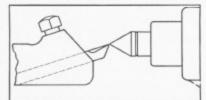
Set Cutting Edge of Lathe Tool Exactly on Center
